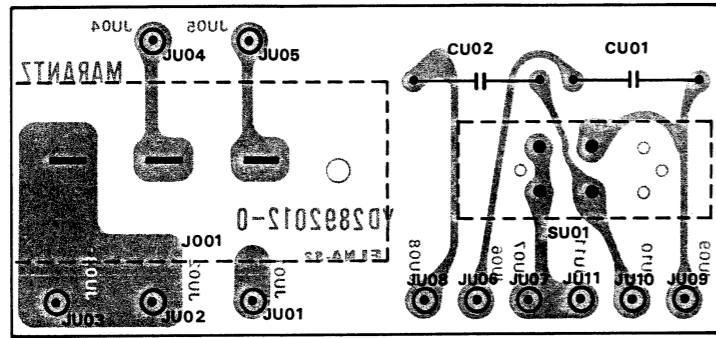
FM De-emphasis Assembly PU01 Component Locations
